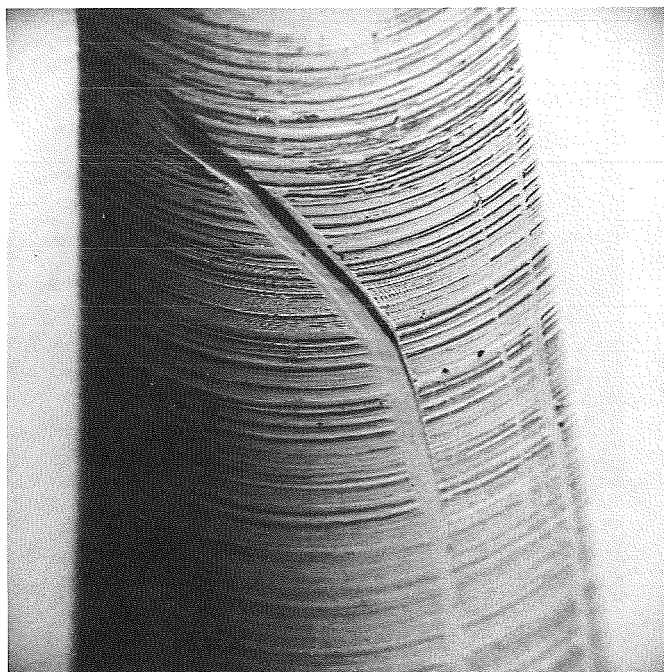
Scanning electron microscope cross-sectional view of 0.029-in.-diam orifice electroformed from Type A nickel using machined stainless steel mandrel
